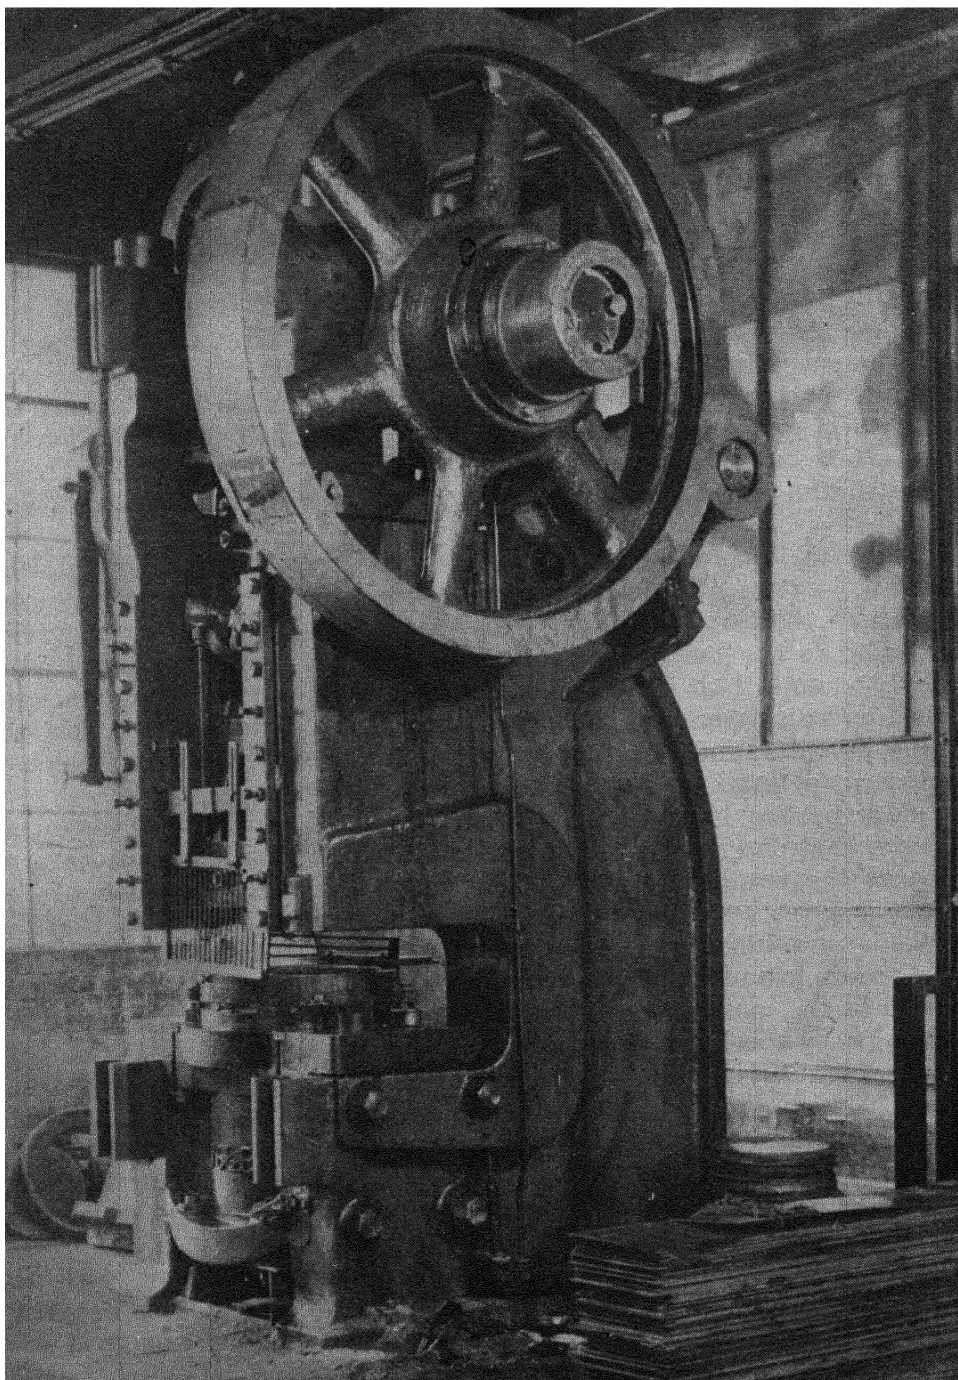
GAP-FRAME PRESS USED FOR FORMING AND SHAPING MOTOR-CAR WHEEL COVERS
